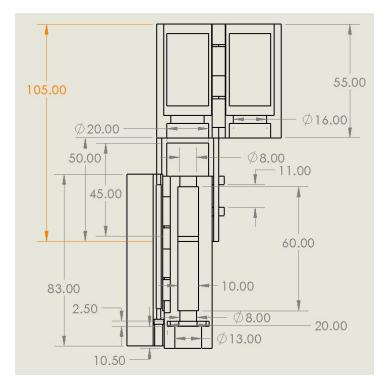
Depicted above is an aerial drawing of the Drawer design. All dimensions are in millimeters, and a circle with a backslash denotes a diameter.
